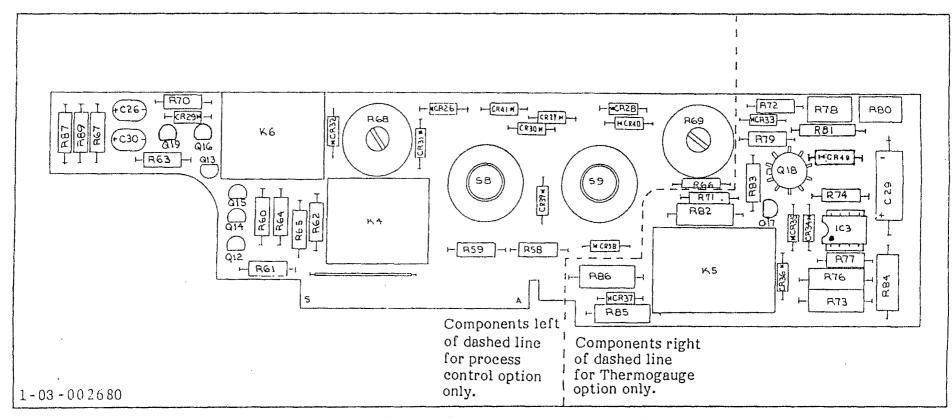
LOCATION OF COMPONENTS ON OPTION PRINTED CIRCUIT BOARD WITH PROCESS CONTROL AND THERMO-GAUGE
